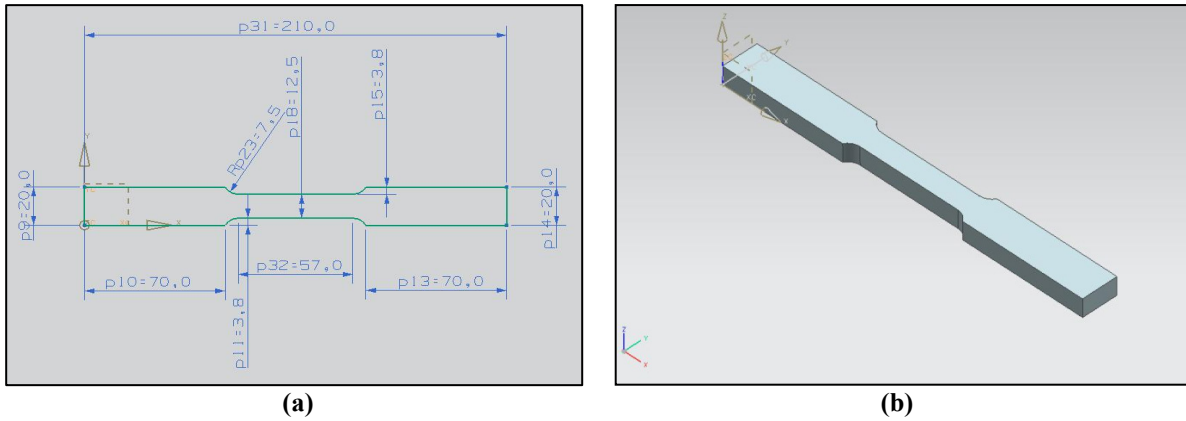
Design of the coupon using UGS NX 6.0: (a) 2D drawing with the dimensions (b) 3D model.
